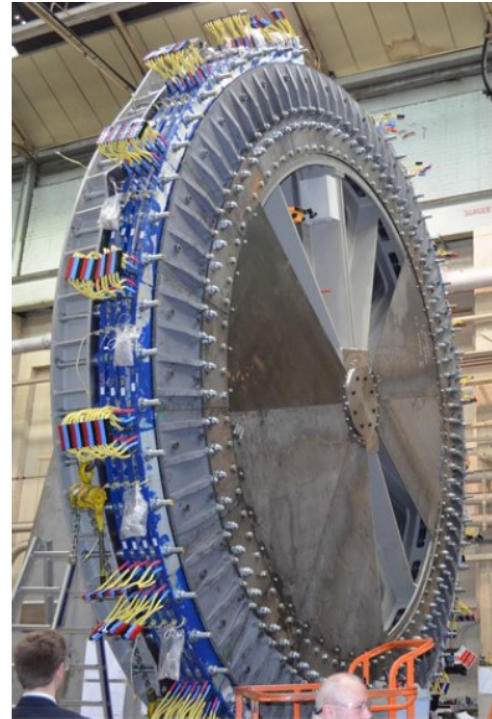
1 MW Demonstrator, 13 rpm, 6.5m diameter
